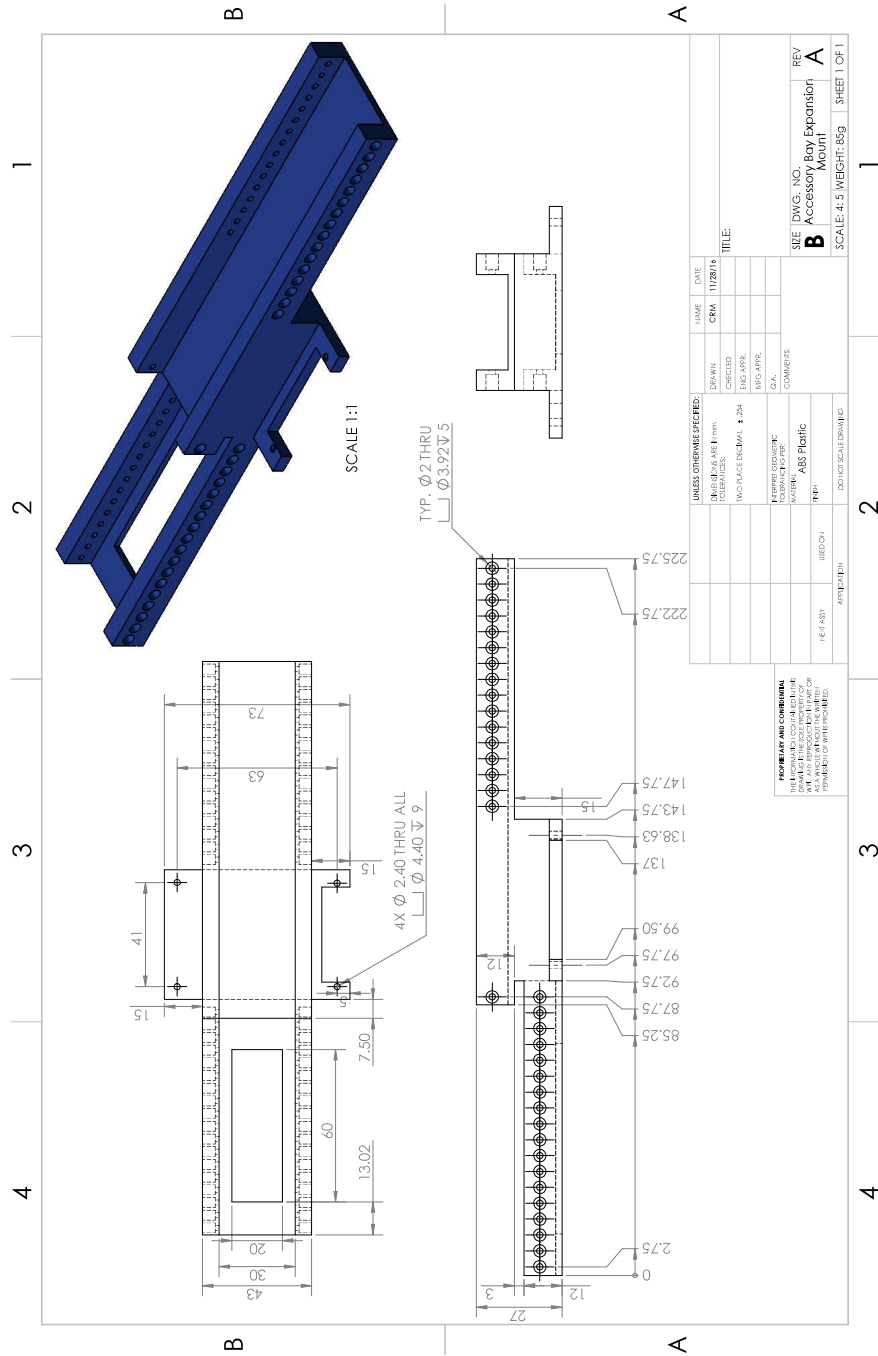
Accessory Bay Expansion Mount Detailed Drawing
